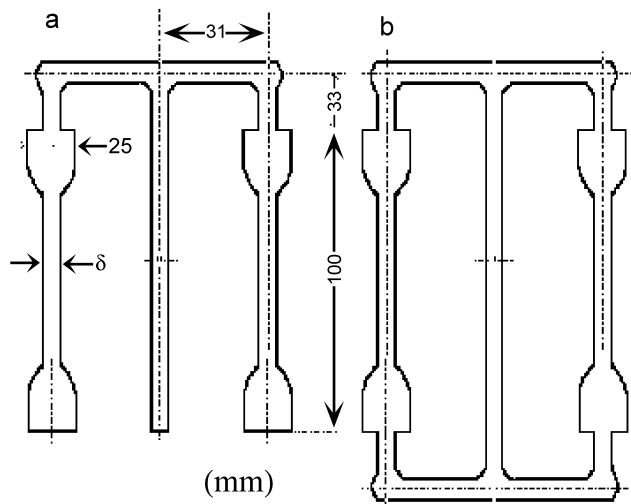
Schematic diagram of mold cavity used for injection-molding samples with and without weld-line (a) no weld-line, (b) with weld-line.
